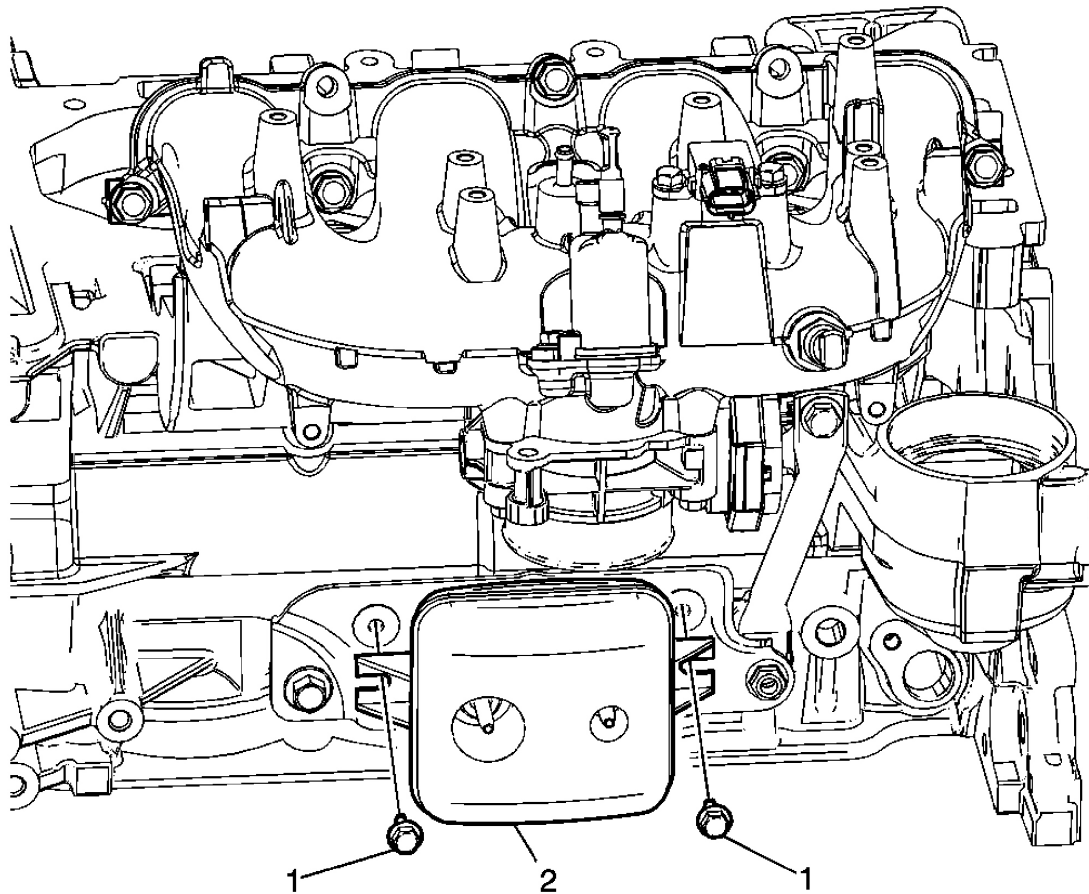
Charge Air Bypass Valve Vacuum Tank
